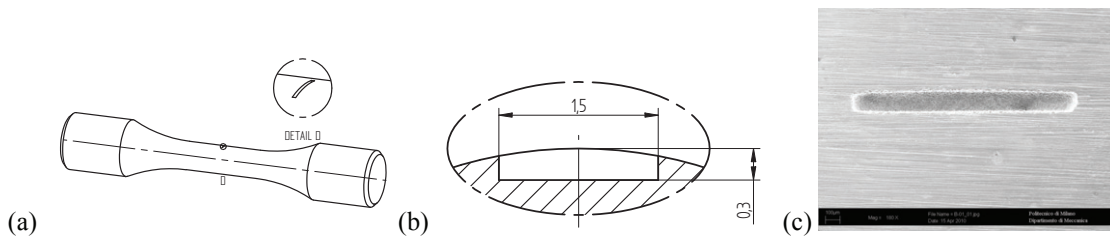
(a) Geometry of specimens for assessing defect sensitivity in short crack fatigue testing (8 mm gauge dia); (b) nominal shape of artificial defect of $\sqrt{\text{area}}=644 \mu\text{m}$; (c) SEM picture of artificial defects produced by EDM.
